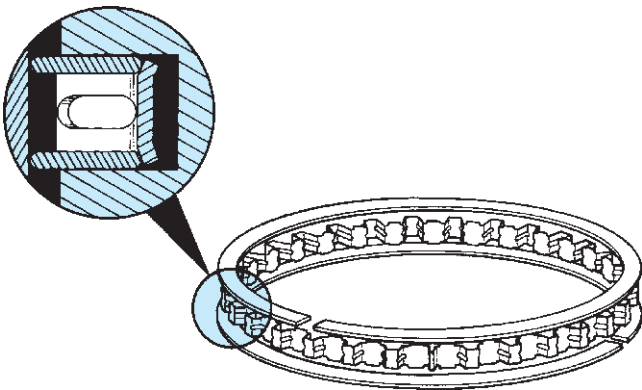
This typical three-piece oil control ring uses a hump-type stainless steel spacer-expander. The expander separates the two steel rails and presses them against the cylinder wall.
